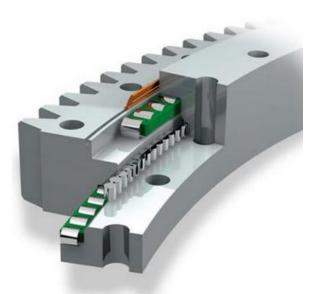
Details of slewing rings in the three-row roller bearings[2]
